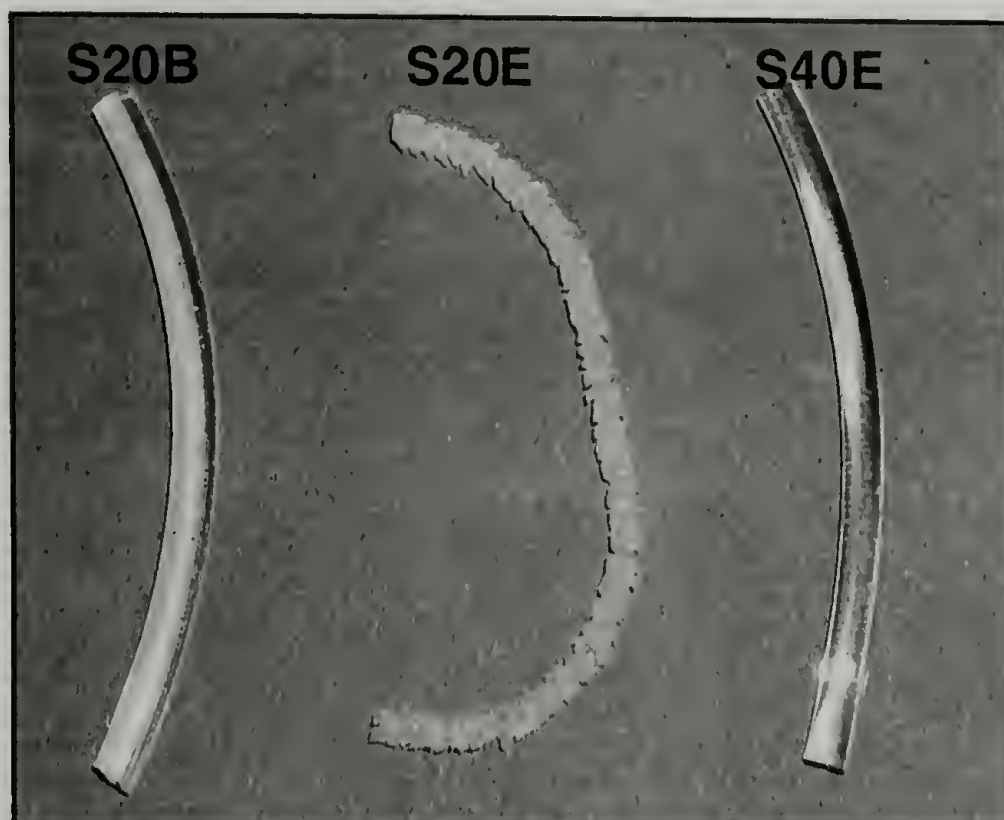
Extrusion processing at 240 °C-DACA Twin Screw Extruder
